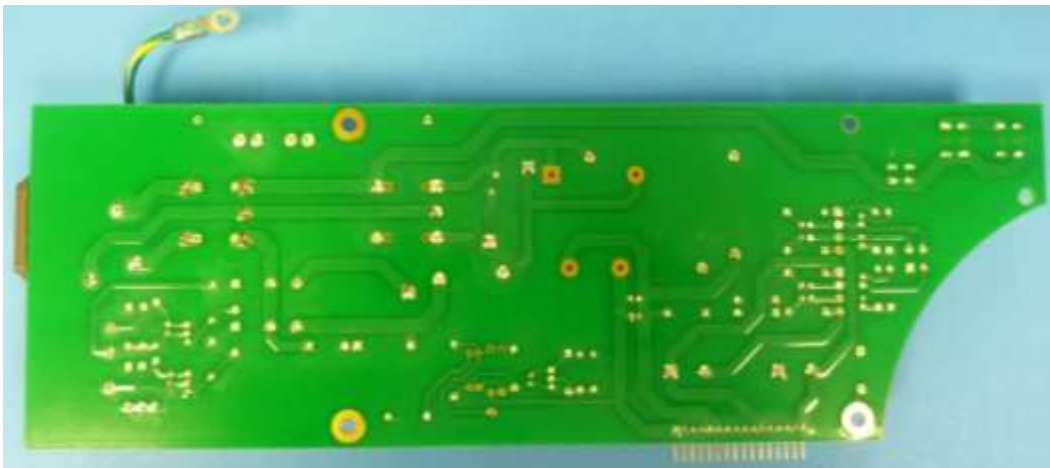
Photo of No5805 and No5802 Power Supply PCB (Bottom View)
